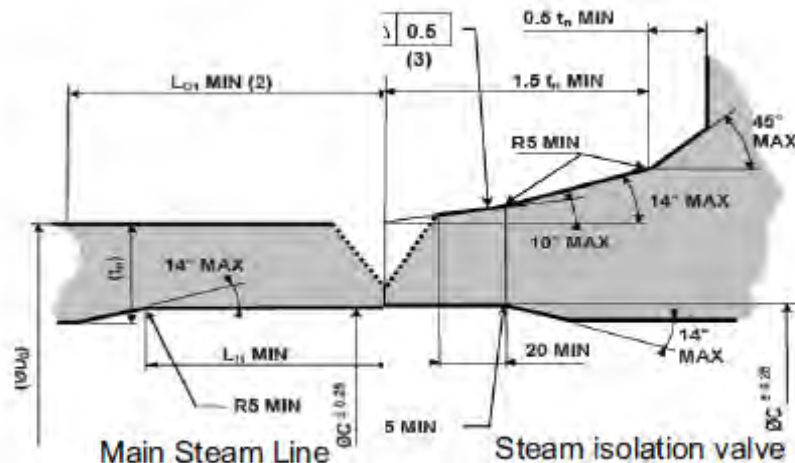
Main Steam Line Weld Preparation Details (from Ref. 69).
